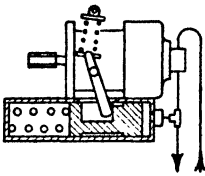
PUMP CLUTCH CONTROL VALVE—SPRING TOGGLE TYPE
